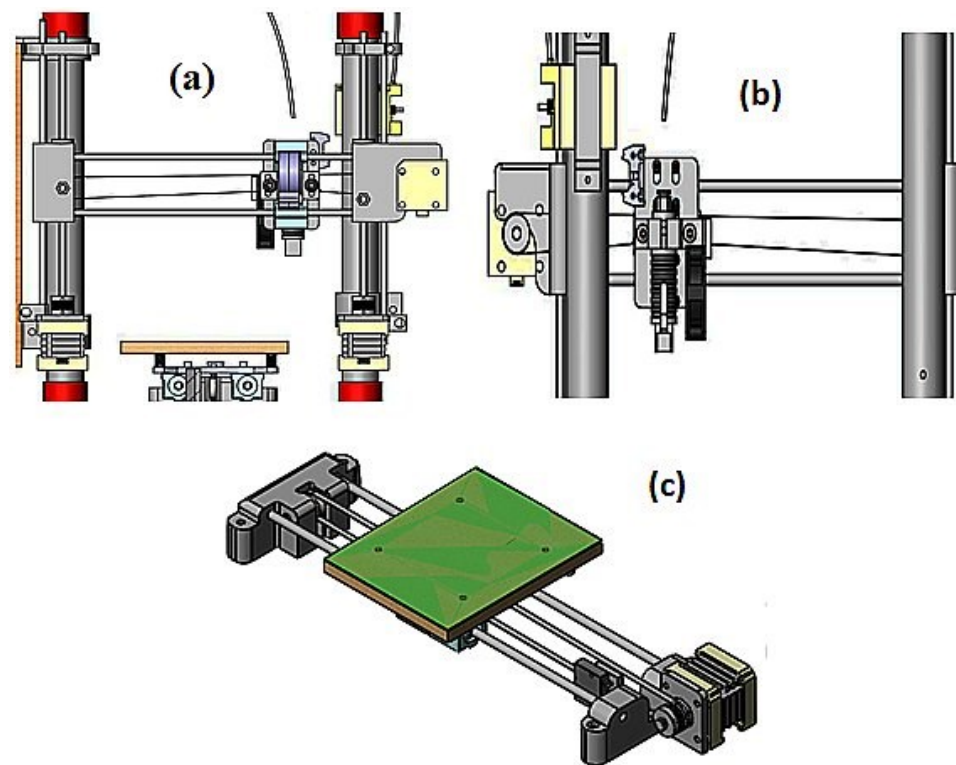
Assembly CAD Model- (a) z-axis Movement, (b) x-axis Movement, and (c) y-axis Movement.
